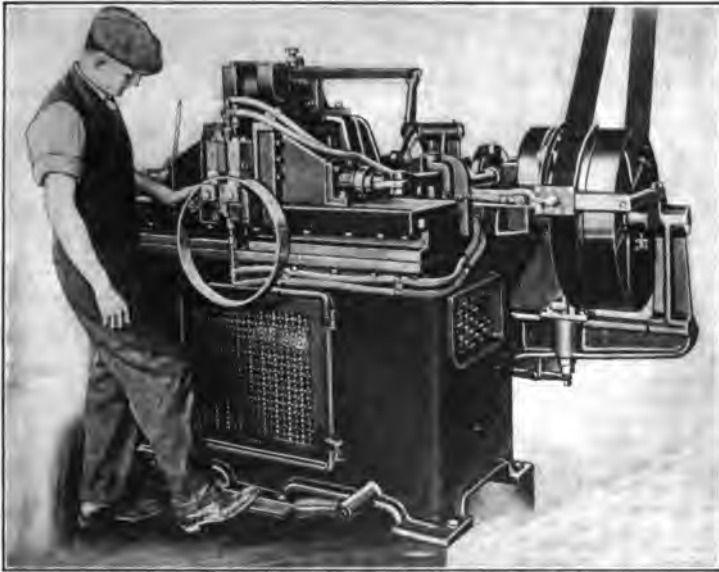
Special Type of Electric Welding Machine built by the Thomson Electric Welding Co. for Welding Automobile Rims and Similar Work
